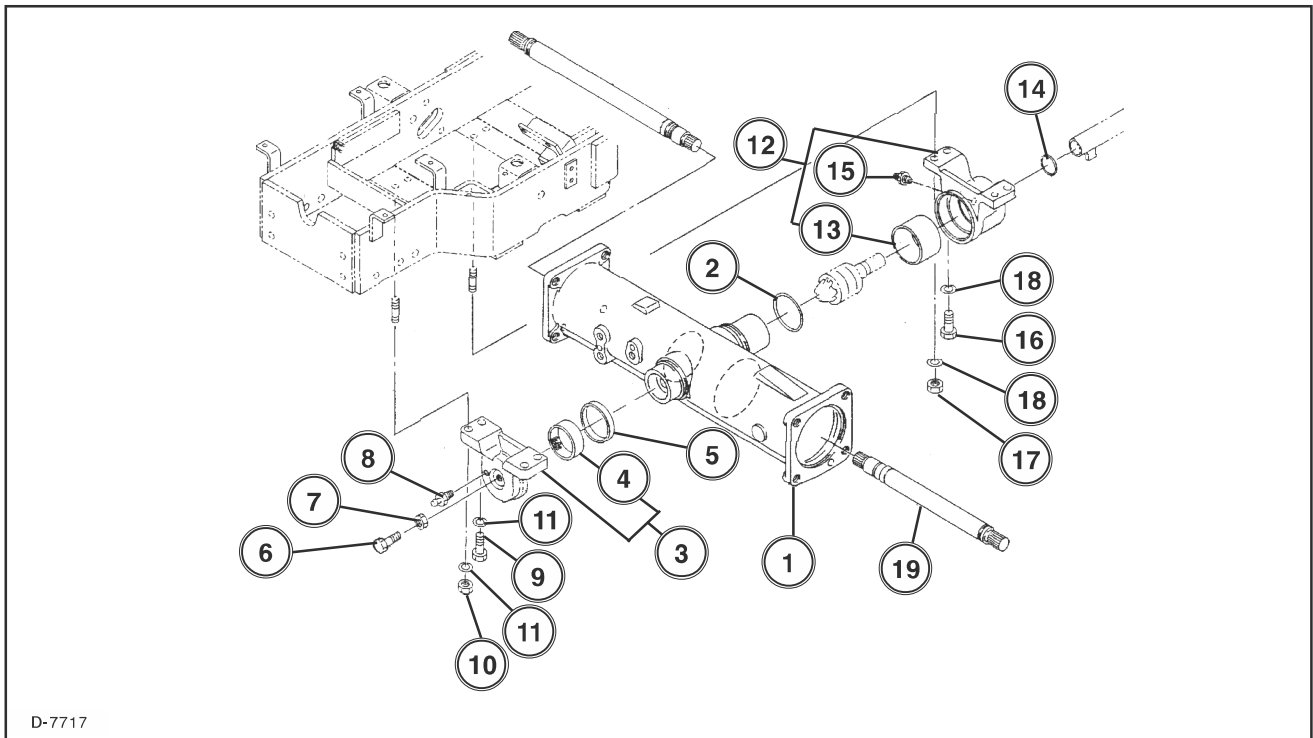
A-04: Move snap rings, 2, toward center of shaft. Slide couplers, 3, towards each other shaft and remove shaft.
